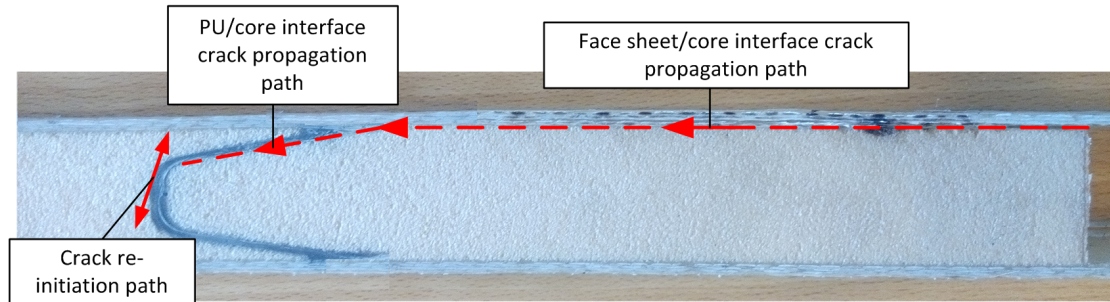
Crack propagation path in STT sandwich beam specimens imbedded with crack stoppers.
